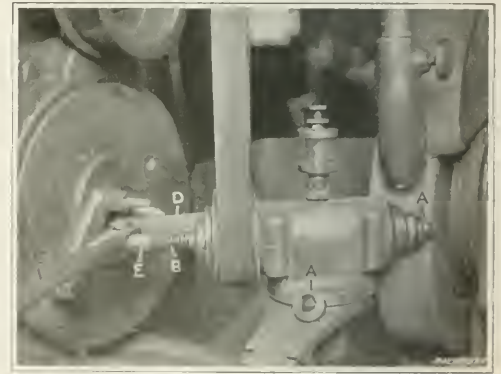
Improvised Fixture used in holding Cone for grinding, that greatly increased Production over Former Method
